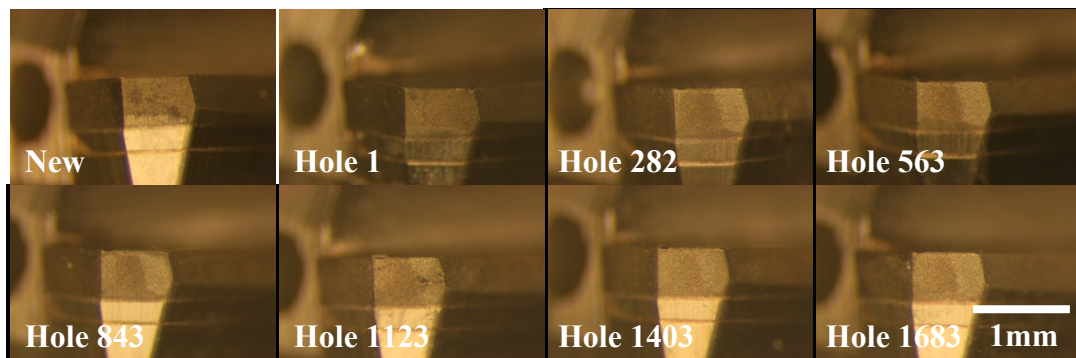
Tool wear micrographs of brazed PCD CTM302 reamer under 70bar through-hole cutting fluid, 96m/min cutting speed (Test 8)
